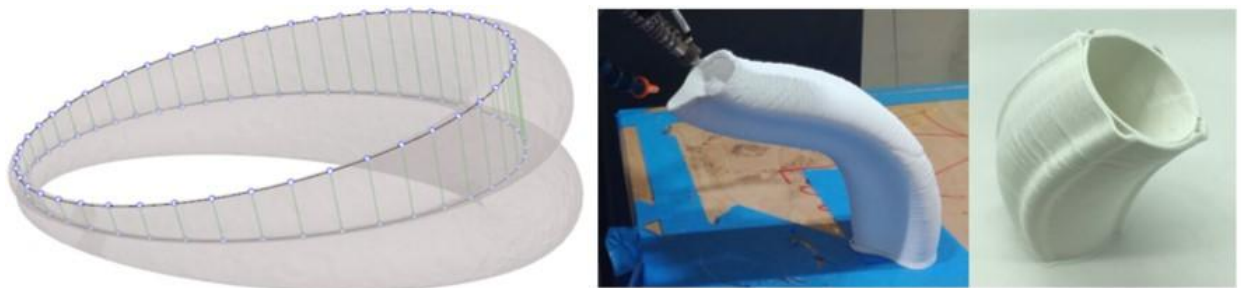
Adaptive extrusion non-planar slicing 3D printing examples
